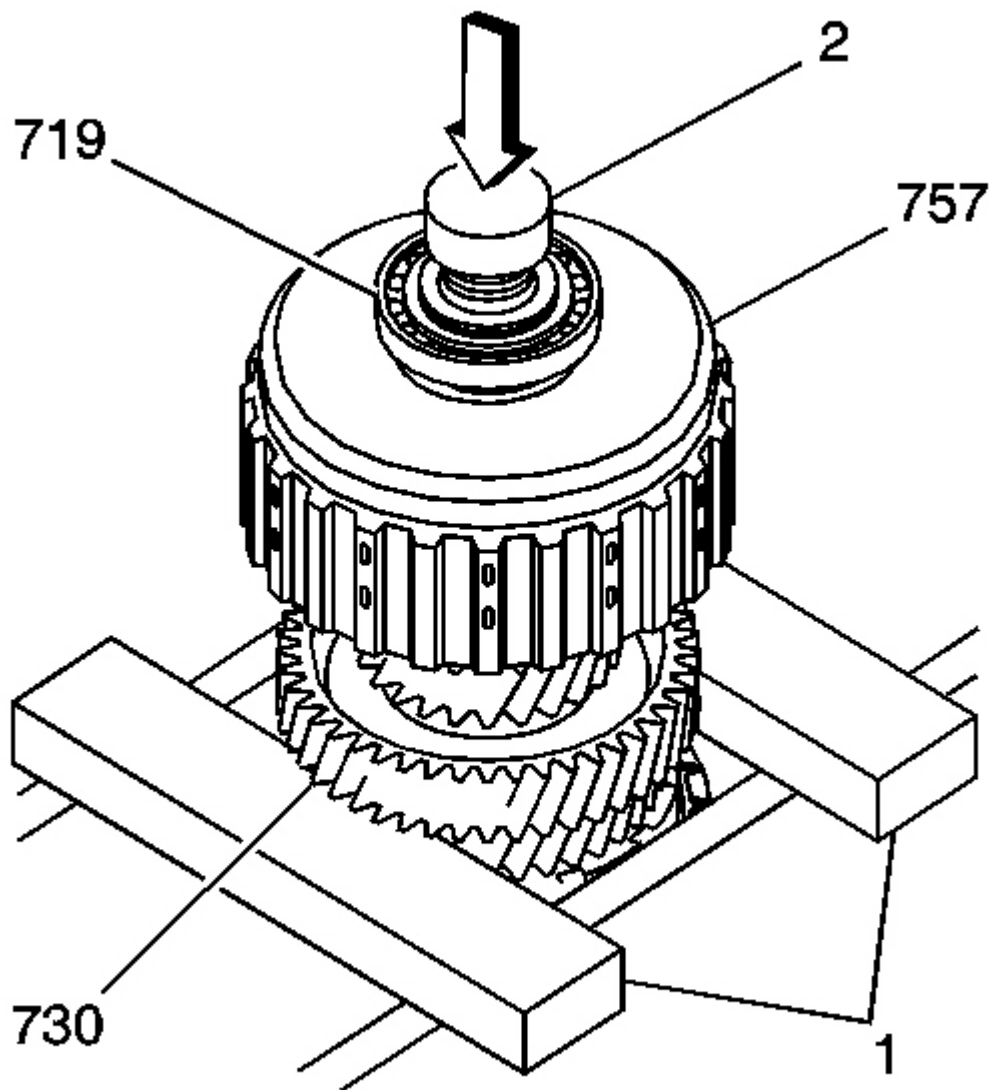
Removing The 1st/2nd Clutch Shaft Rear Bearing & the 1st/2nd Clutch Drive Gear Using A Hydraulic Press
